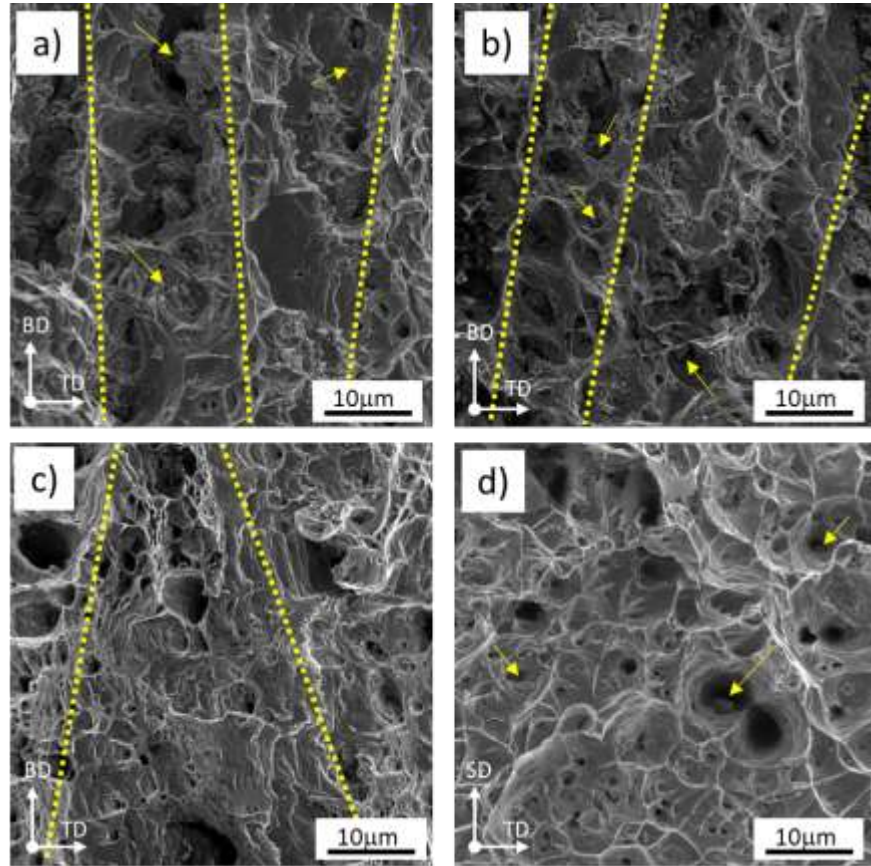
The fracture surface of the CMT WAAMed Inconel 625 wall element samples: bottom (a), middle (b), top (c) cross (d).
